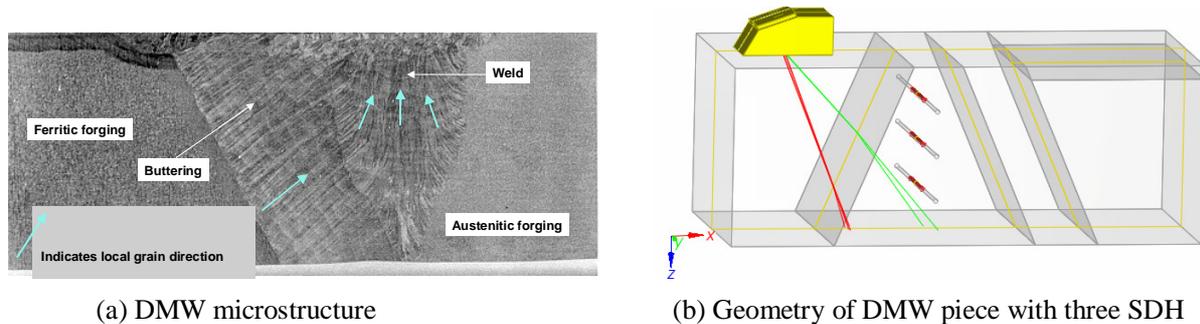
Nozzle to shell weld inspection parameter justification
